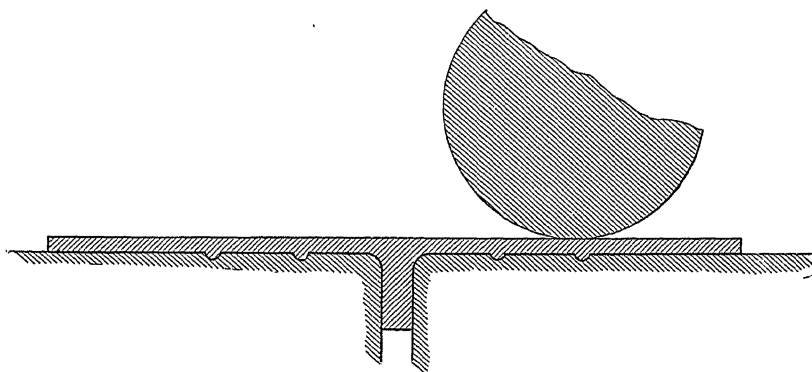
COLUMN-SECTION WITH PROJECTIONS PARALLEL TO LENGTH, ROLLED BY TRANSVERSE MILL.
